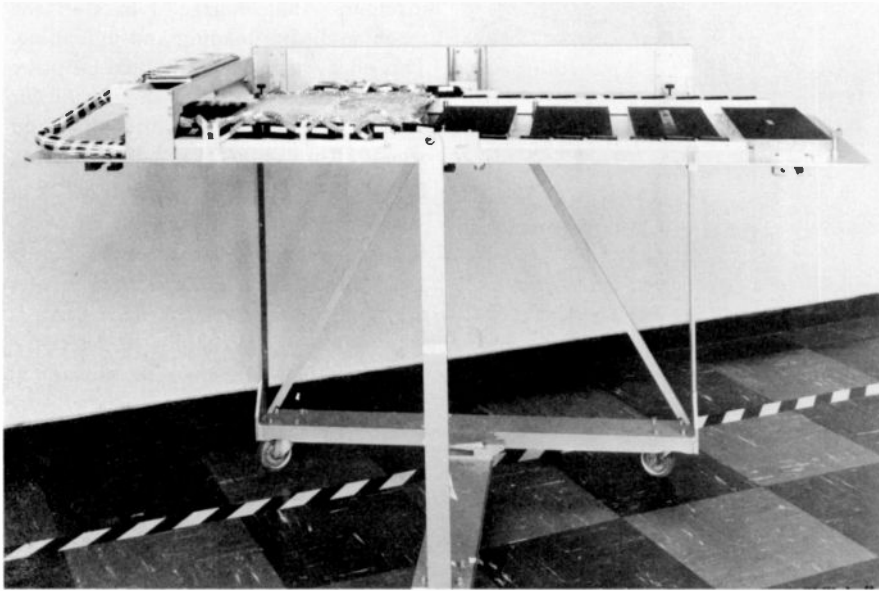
A typical backplane UUT is shown with the T cart mounting surface in the horizontal "load-unload" and "repair" position.
